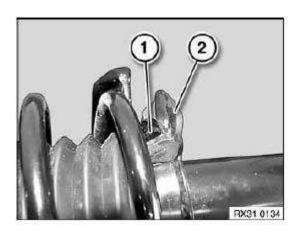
Identifying Lower Coil Spring And Spring Pad Courtesy of BMW OF NORTH AMERICA, INC.
